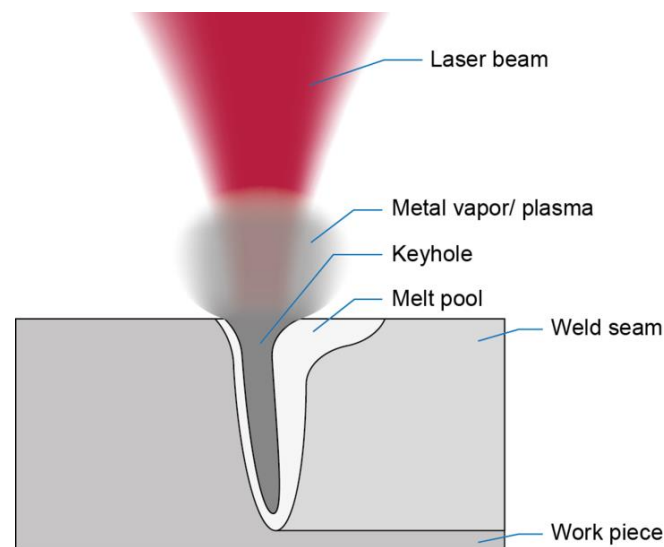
The schematic of melt pool shape and deep penetration welding [5].
